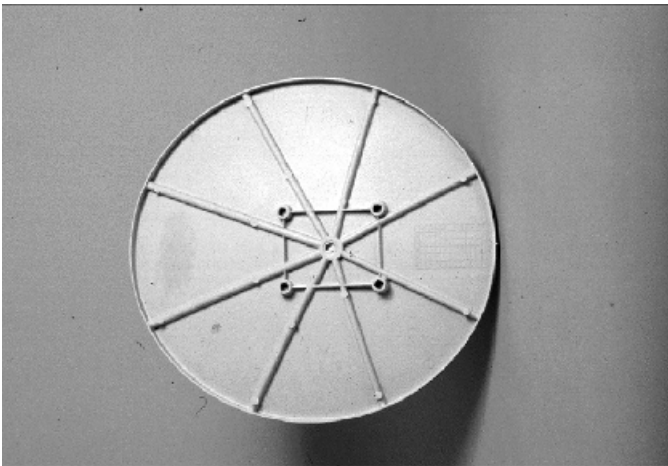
Gas-assisted injection molding rib pattern.
